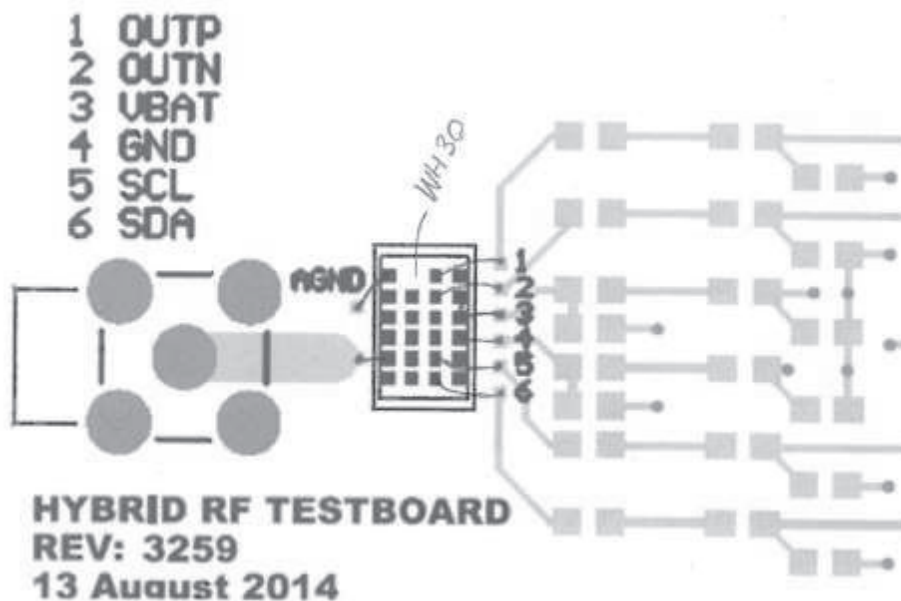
The PCB layout of Hybrid test boards with MIC1 connection on PCB layout.
